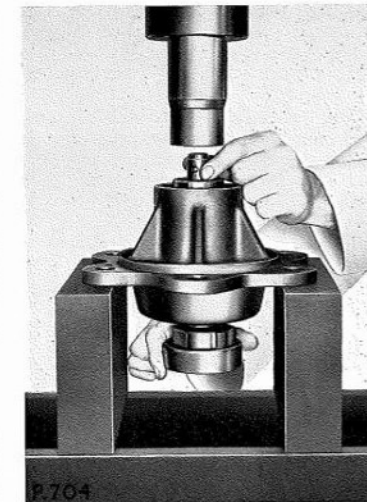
Pressing out the KA.30 front hub inner bearing cup using the Remover Pad of Churchill Tool R.G.324 together with the Universal Handle 550
